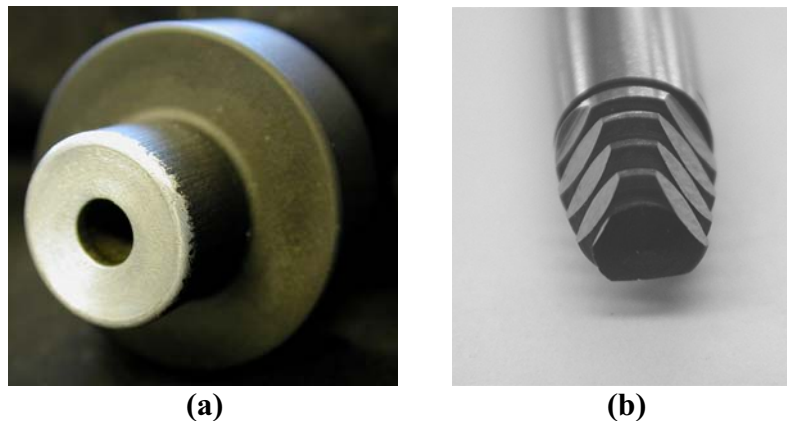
FSW tool used to produce the joints. (a) Concave shoulder and (b) threaded 3 flats pin, shown separately.
